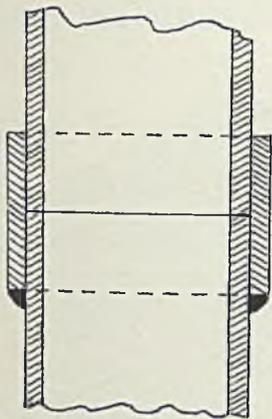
Slip joint. Lower side of coupling is welded by pipe manufacturer
